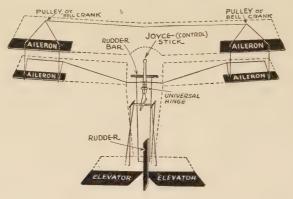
Control surfaces, in black, showing method of control hook-up.
